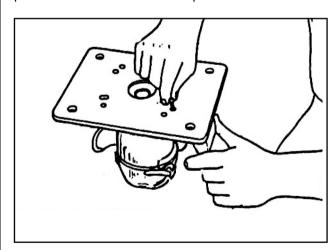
Attach table plate to router using the proper mounting screws for your machine (not included.)
